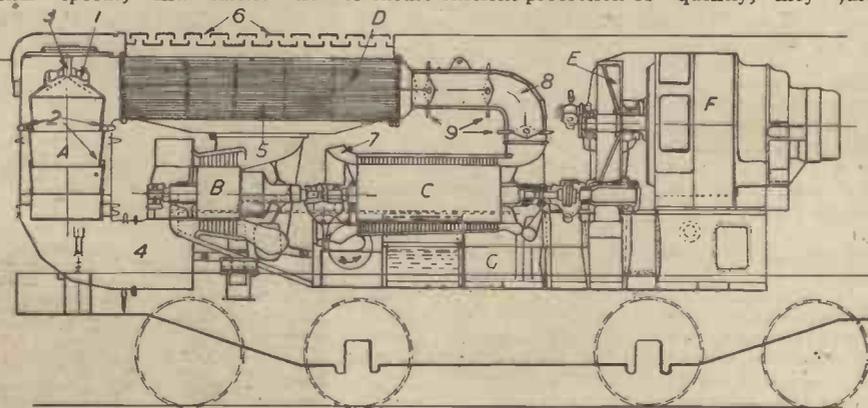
Diagrammatic section of the new Brown-Boveri turbine-driven locomotive: (A) Combustion chamber. (B) Gas turbine. (C) Turbo-compressor. (D) Preheater. (E) Set of gearing. (F) Generator. (G) Auxiliary frame. (1) and (2) Inlets for combustion air and cooling air, respectively. (3) Inlet for fuel (heavy oil). (4) Mixing chamber for propelling gas. (5) Inlet for exhaust gases into preheater. (6) Exhaust gas outlet. (7) Air inlet. (8) and (9) Pipe for compressed air.
